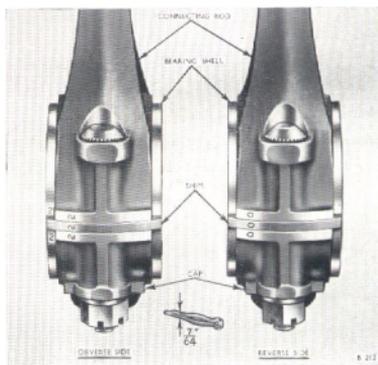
Connecting rod big-end showing markings and special type split pin for bolts.
